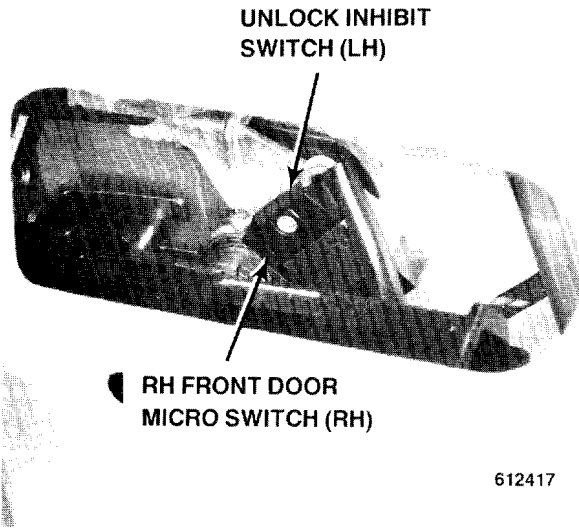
Inside Rear of LH Front Door (RH Similar)
